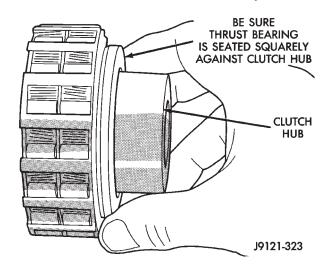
Installing Overrunning Clutch Thrust Bearing
